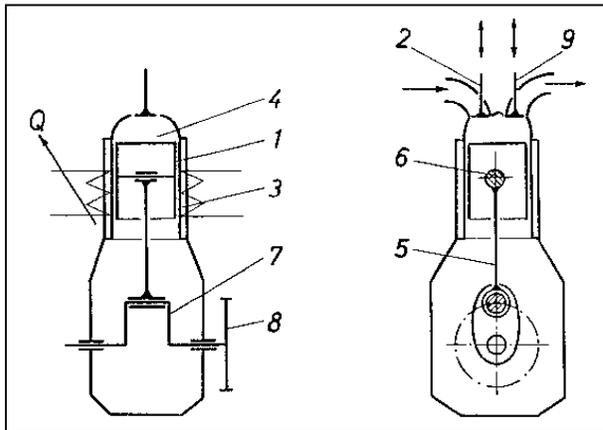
Principal scheme of a 4-stroke engine.1 piston, 2 inlet valve, 3 cylinder, 4 combustion chamber, 5 connection rod, 6 gudgeon pin, 7 crankshaft, 8 flywheel, Q head rejected (cooling).
